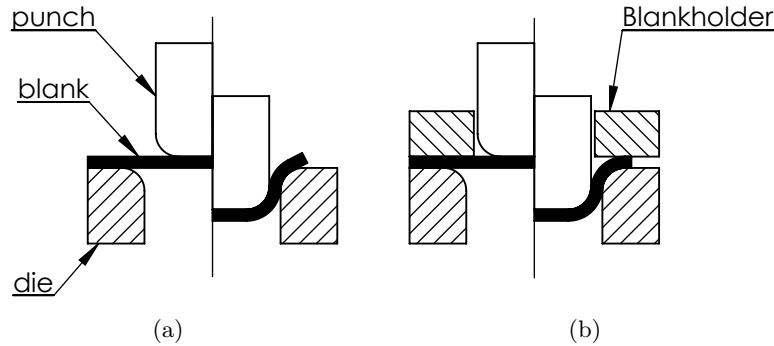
Basic drawing process: (a) without blankholder, (b) with blankholder
